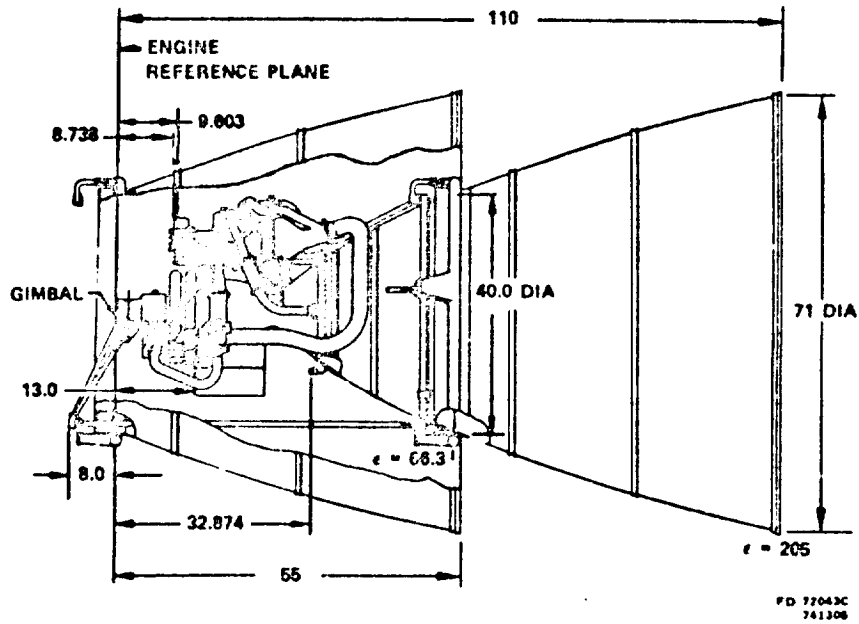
Derivative IIA Engine Installation Drawing (Sheet 1)
